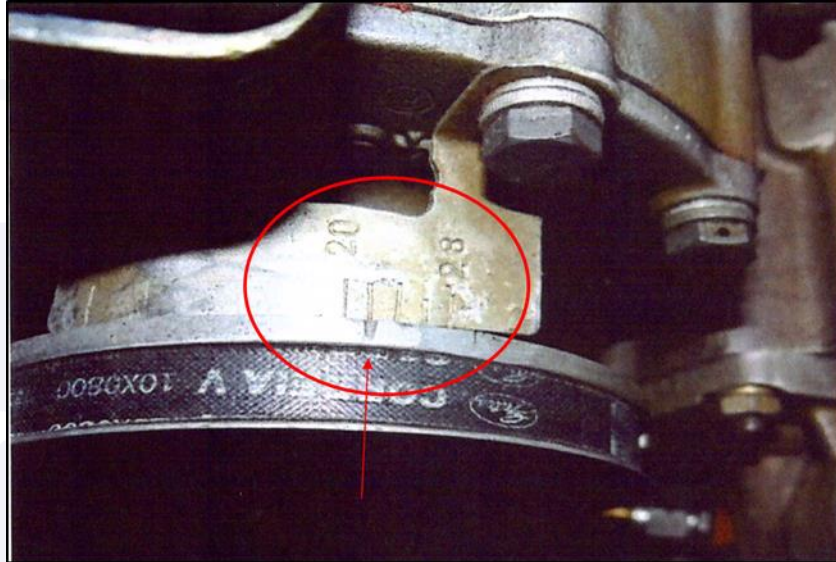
Marking on the rear pulley with 22° as per the ignition advance engraved on the engine identification plate. At this marking, the timing light should illuminate.
